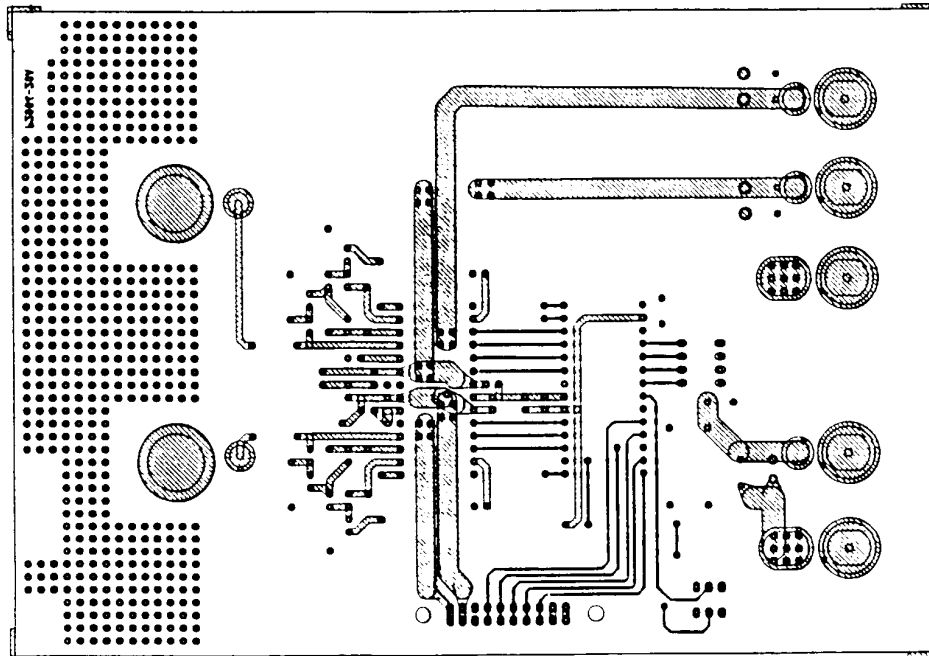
DEM-PCM1760 Board Layout—Component Layout.
